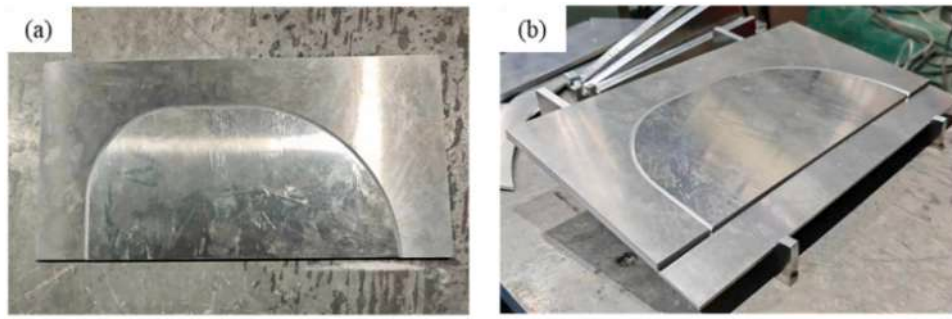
Welding verification experiment workpiece (a) The shape of the workpiece (b) The posture of the workpiece.
